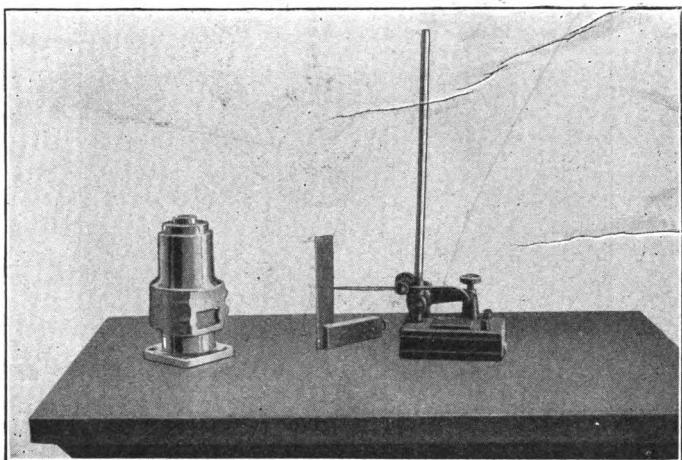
Adjusting the surface gauge with a small square and scale with the cylinder a distinct scratch will be made in the proper place on the cylinder.
